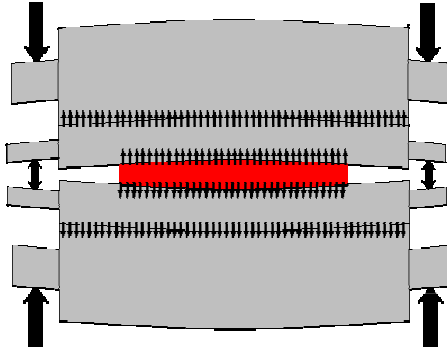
Principal sketch of a four-high mill with forces from the plate, the work roll bending and back-up roll bearings exposed.
